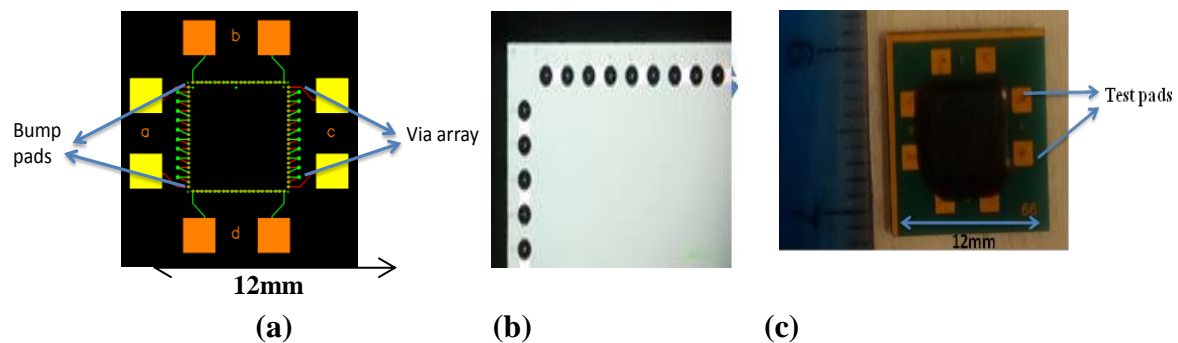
(a) 3D Assembly test vehicle design (b) flip-chip test die (c) Assembly test vehicle
